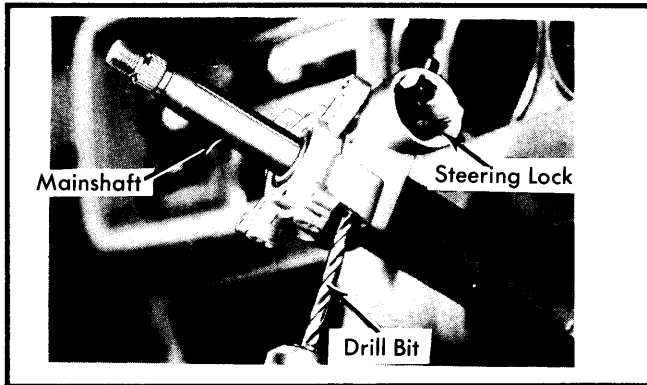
Drilling Out Shear Head Bolt to Remove Steering Lock from Shaft
